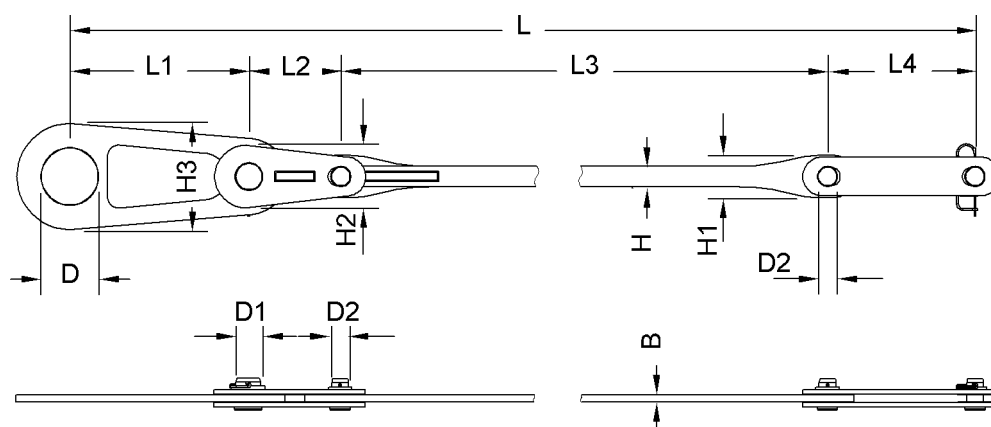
Dimensions of jib pendant strap on 1713 jib head section
